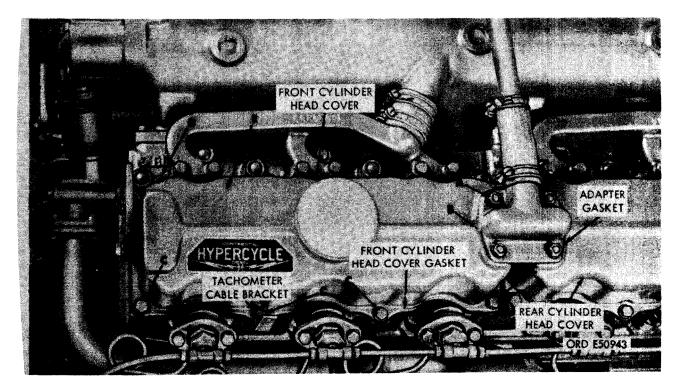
REMOVING OR INSTALLING FRONT CYLINDER HEAD COVER.
